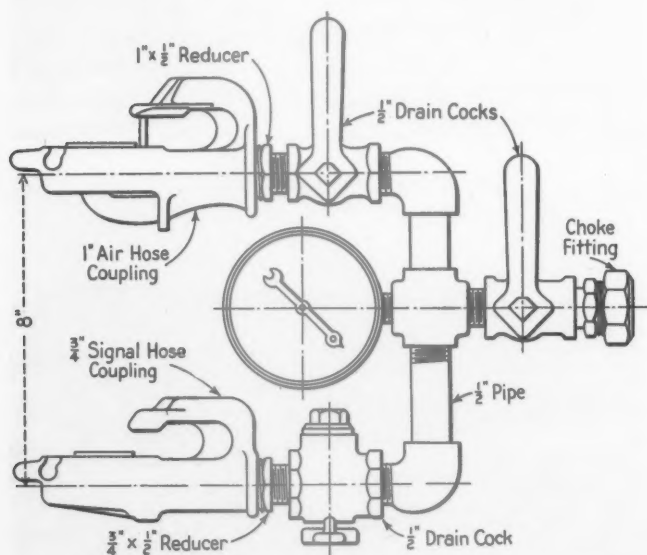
Feed and distributing valve test device for use at the rear end of the tender
